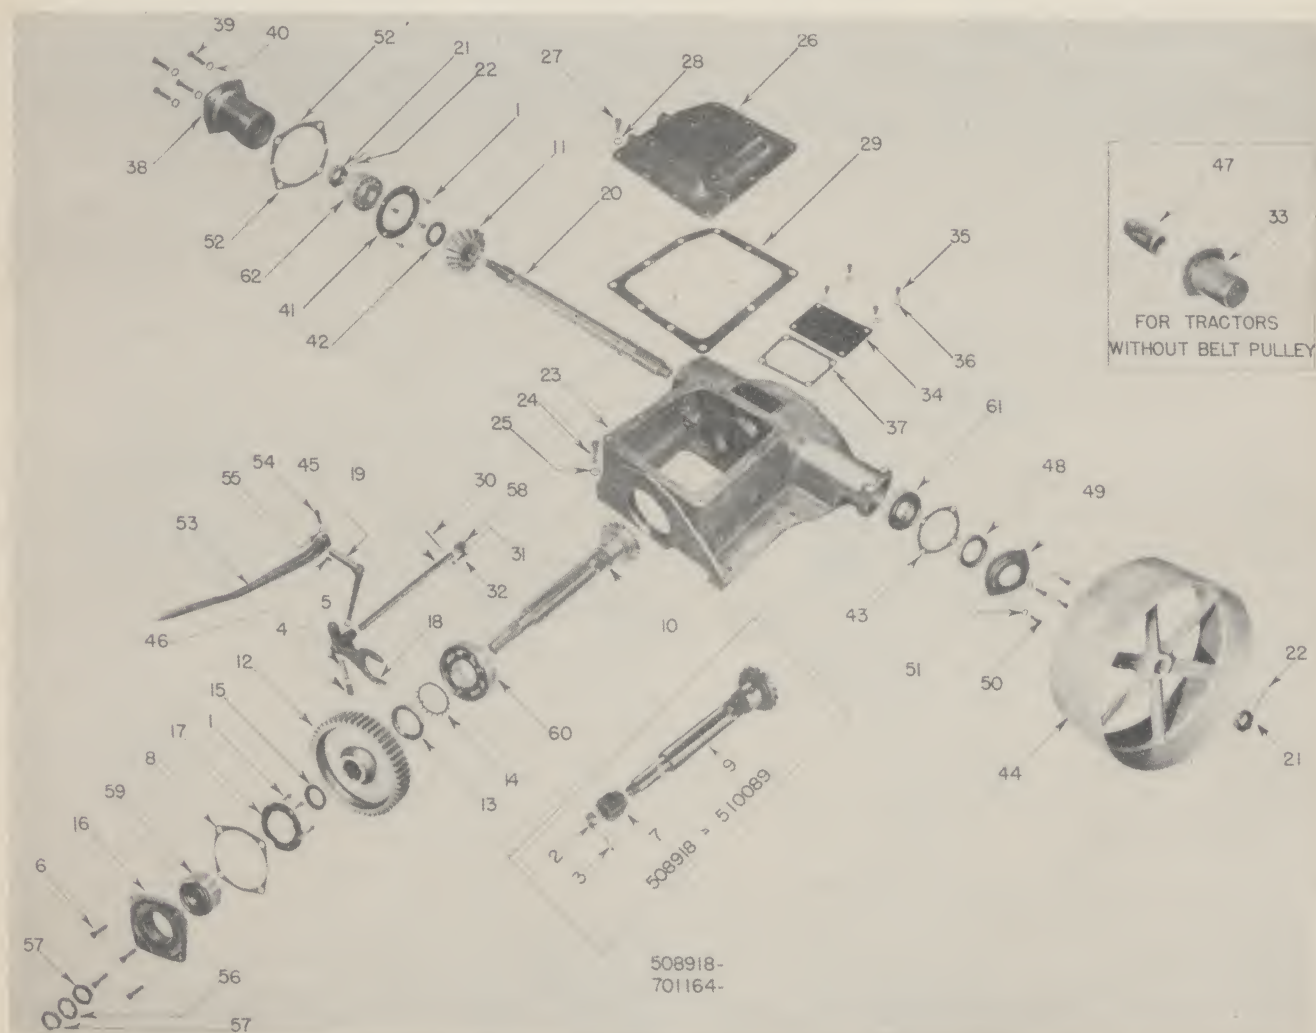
Components of belt pulley carrier assembly used on tractors equipped with 4 speed transmission.
